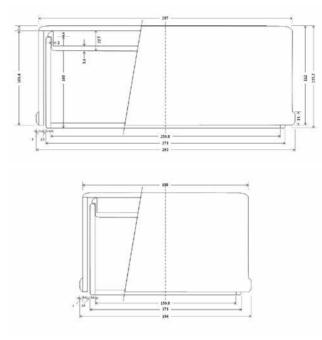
Longitudinal cross-section of the incense box. Fig. 25. Transverse cross-section of the incense box.
